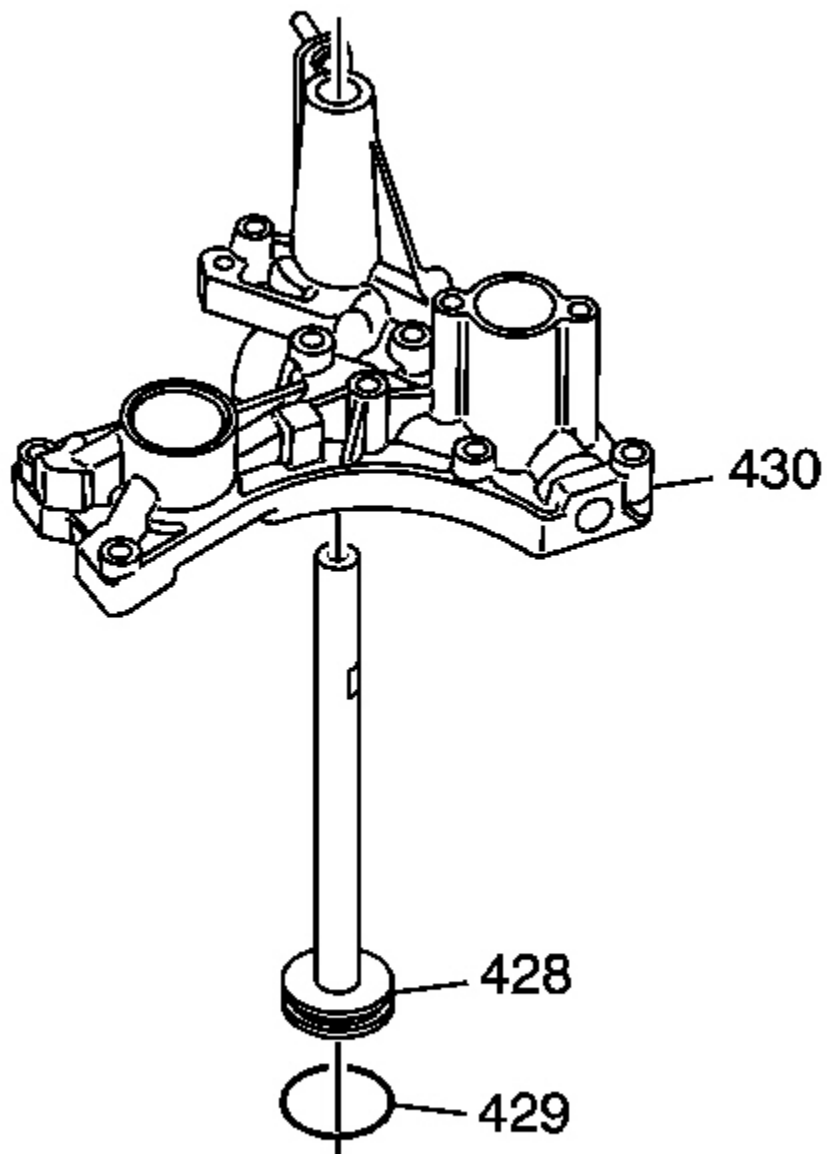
Reverse Shift Fork, O-Ring Seal & Regulator Valve Body
